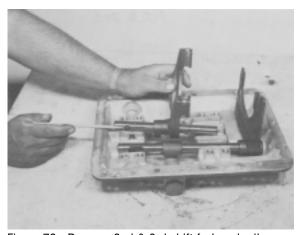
Remove 2nd & 3rd shift fork and rail assembly. CAUTION: Do not lose interlock cross pin.
